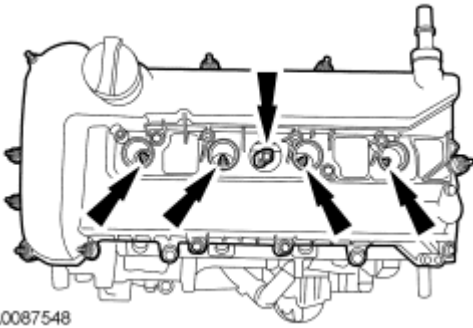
Locating Cylinder Head Temperature (CHT) Sensor & Spark Plugs
